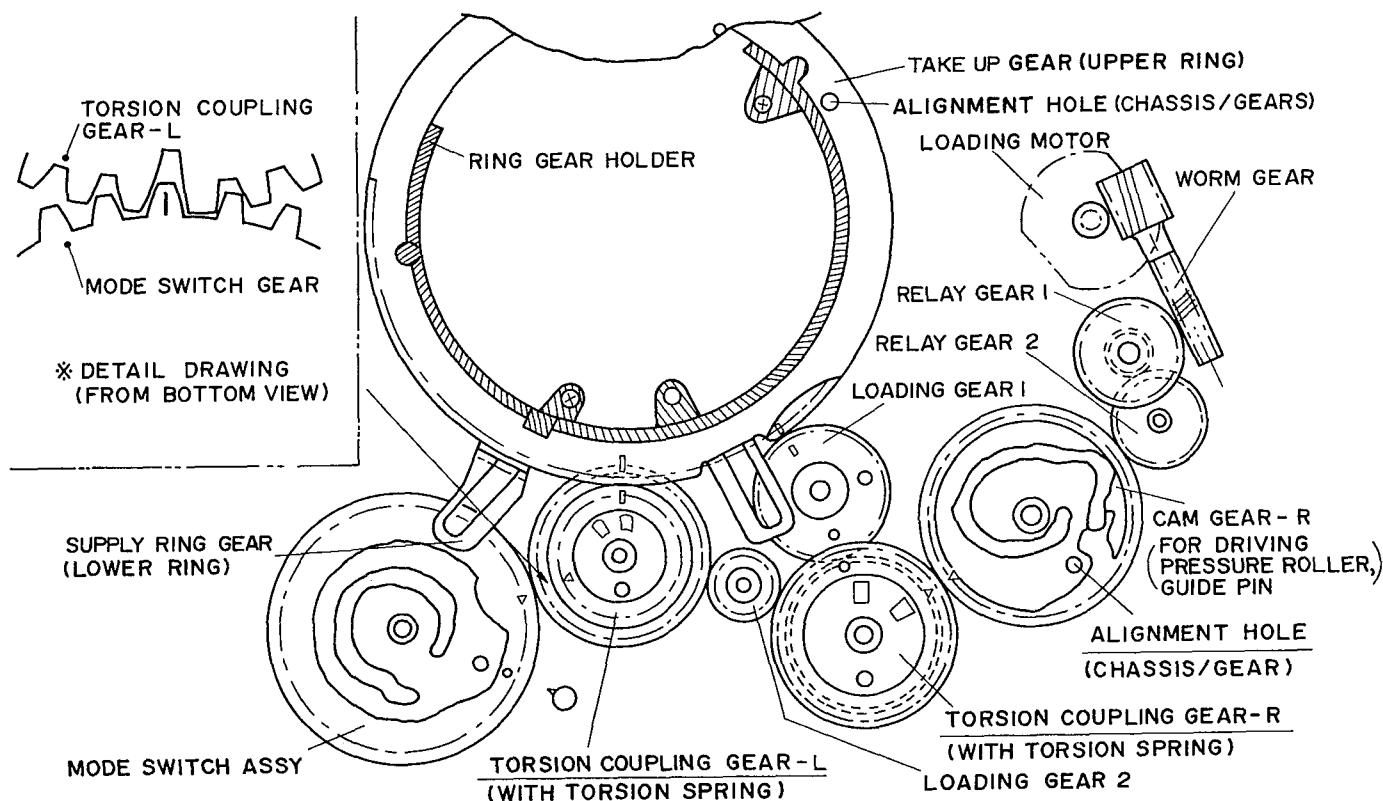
Loading Mechanism of TH Chassis (Top View)
